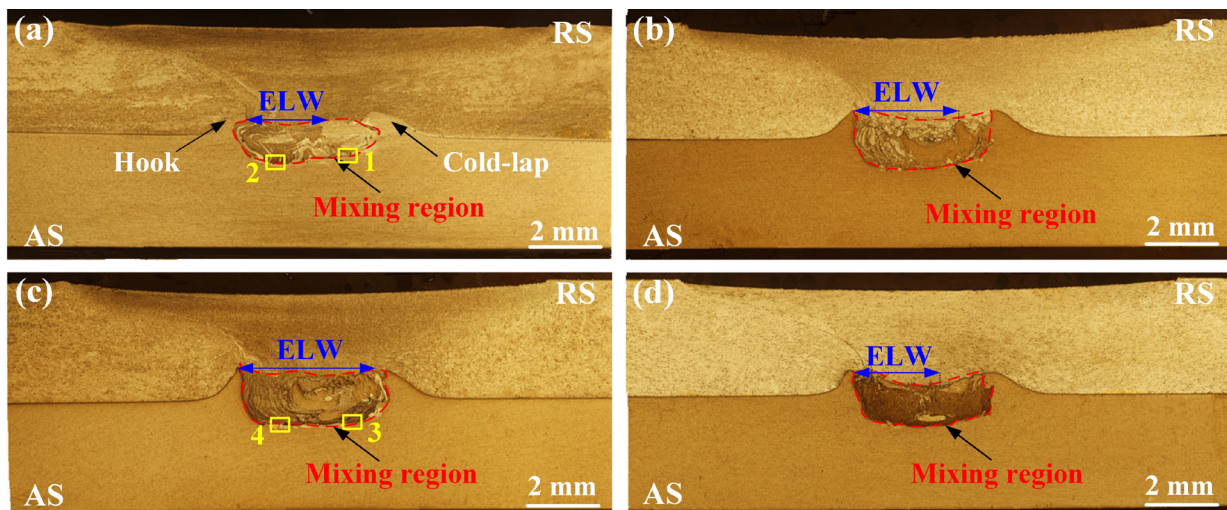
Macrostructures of dissimilar Al/Mg FSLW joints at different welding speeds: (a), (b), (c) and (d) 200, 150, 100 and 50 mm/min
